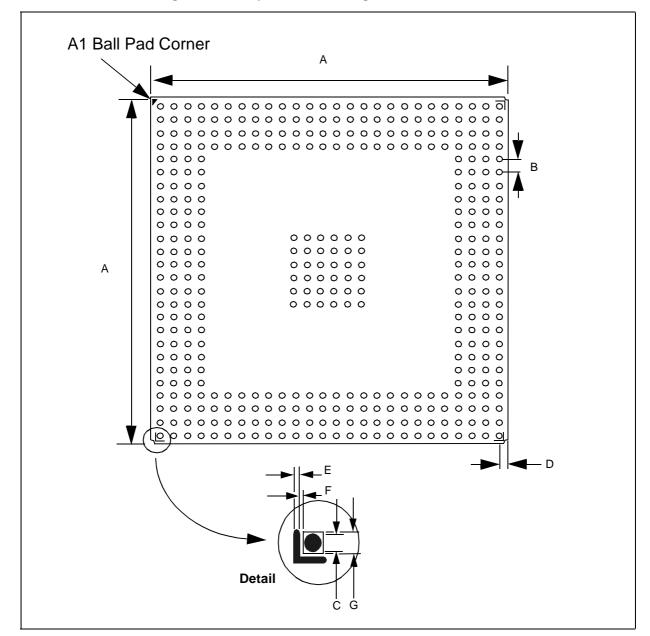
388-pin PBGA Package - PCB Dimensions
